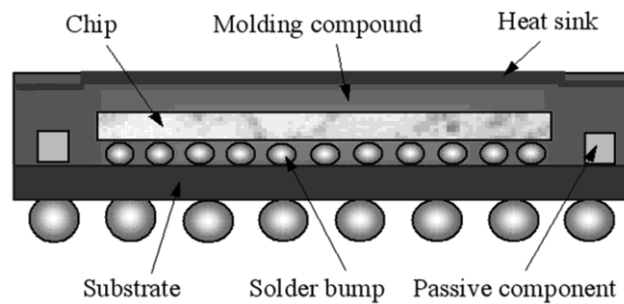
Cross section of Single Molded Underfill of Flip Chip Package
